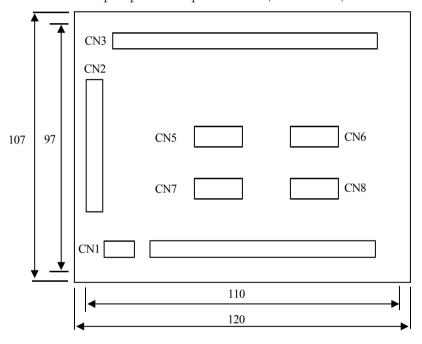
P62-05Adapter plate external dimensions where mounting hole diameter: $\varphi 3$ mm.
